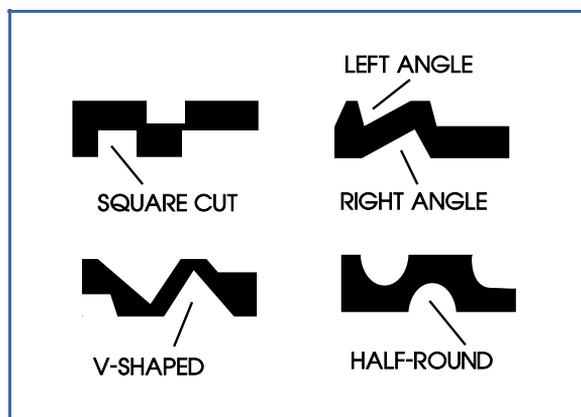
This figure shows four end views of the common milling groove shapes used in cylinder keys.
